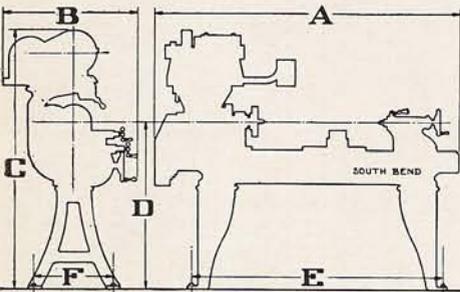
Floor Leg Lathe, Silent Motor Drive
